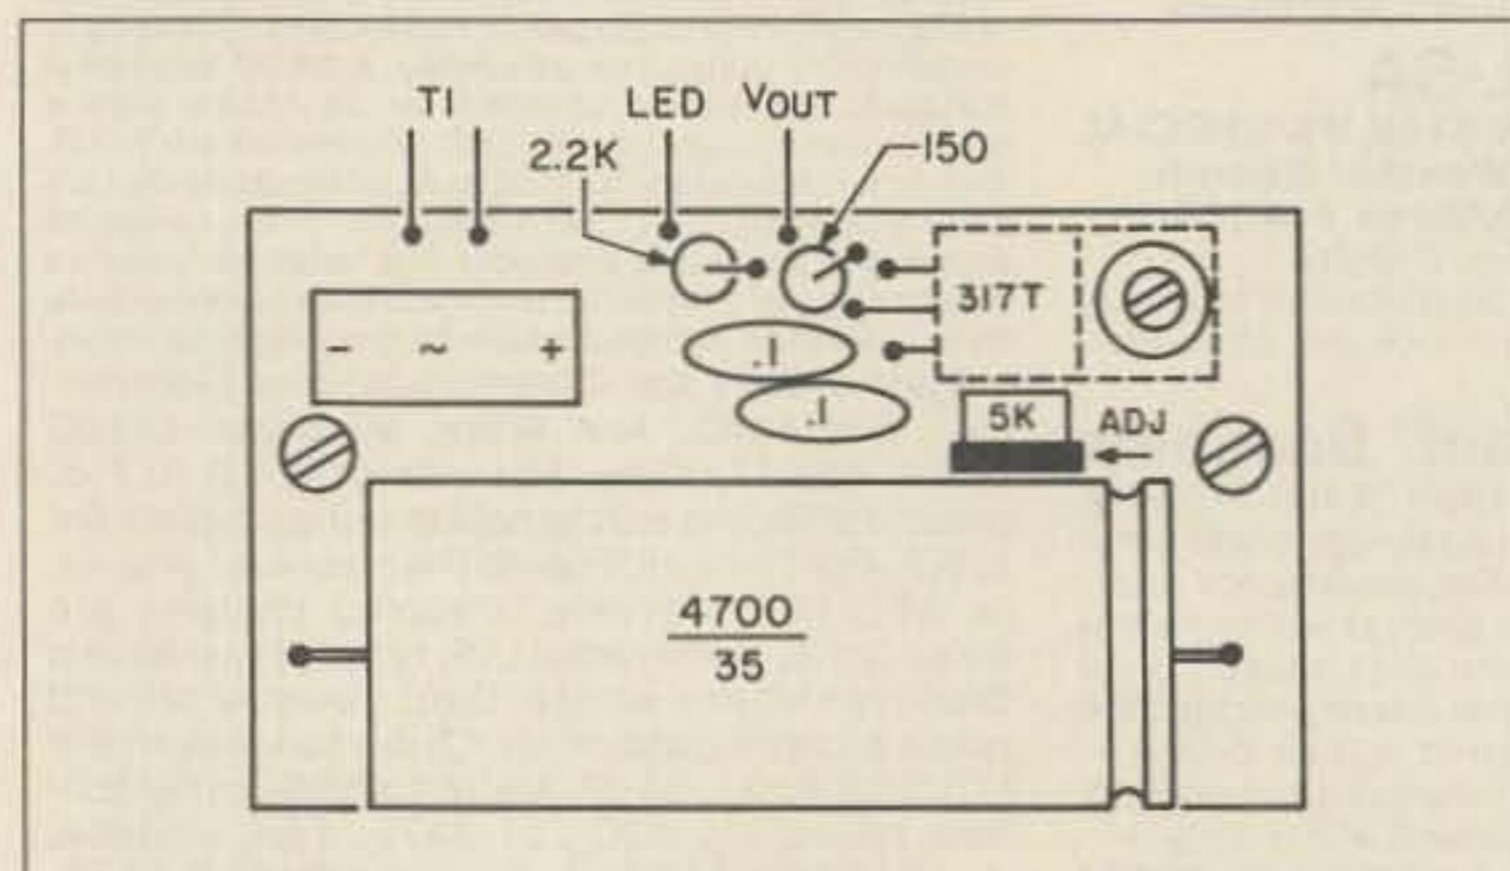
A and 2B. Parts layout and mounting detail for the power supply regulator module. The circuit board is available from Radiokit.
